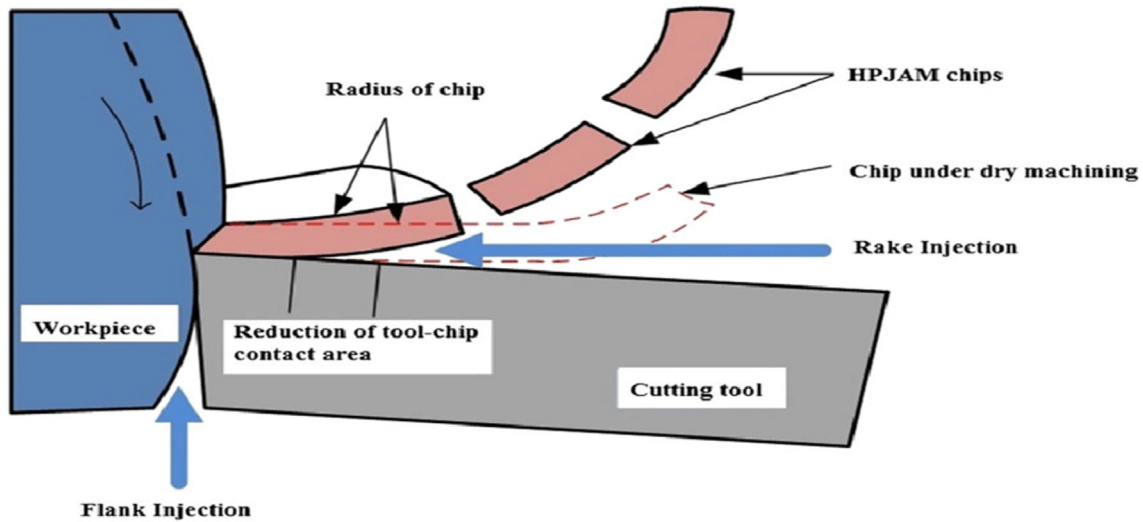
direction of injection in high-pressure jet-assisted machining [23]
